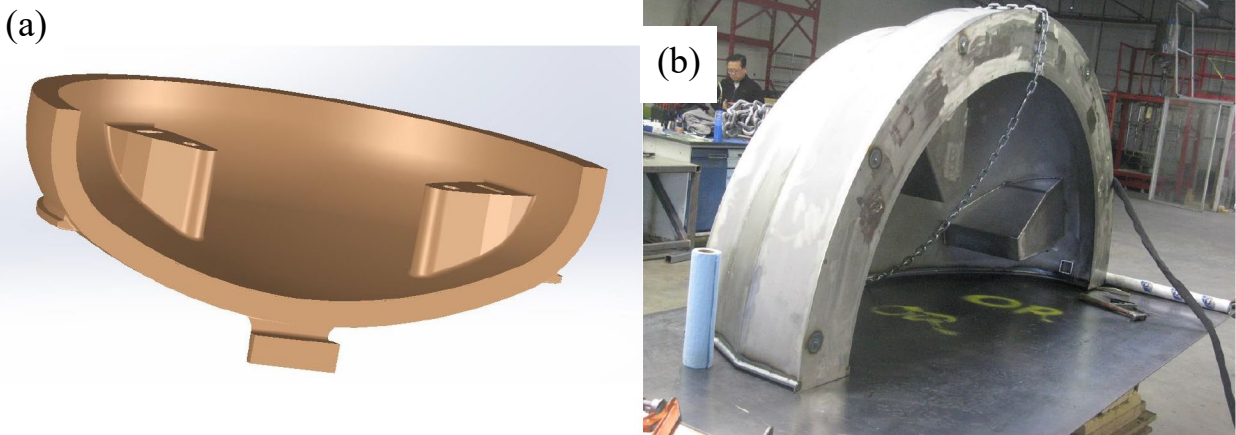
(a) A508 lower head of the SMR and (b) HIP capsule for the lower head
